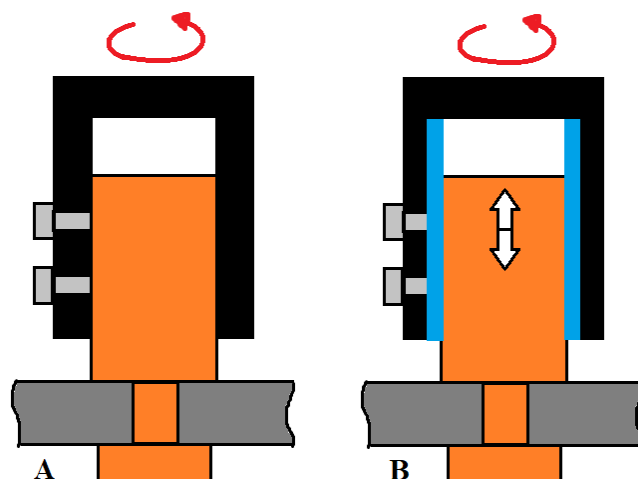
Bobbin tool FSW tools. (Modified from [2]). A: conventional BT-FSW tool, B: floating BT-FSW tool
